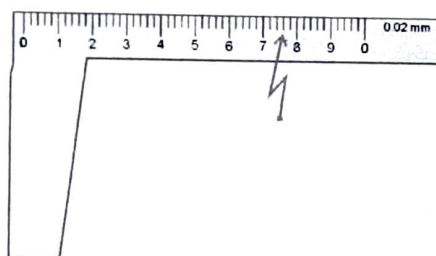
The movable jaw of the caliper with the engraved vernier scale indicated on it.
